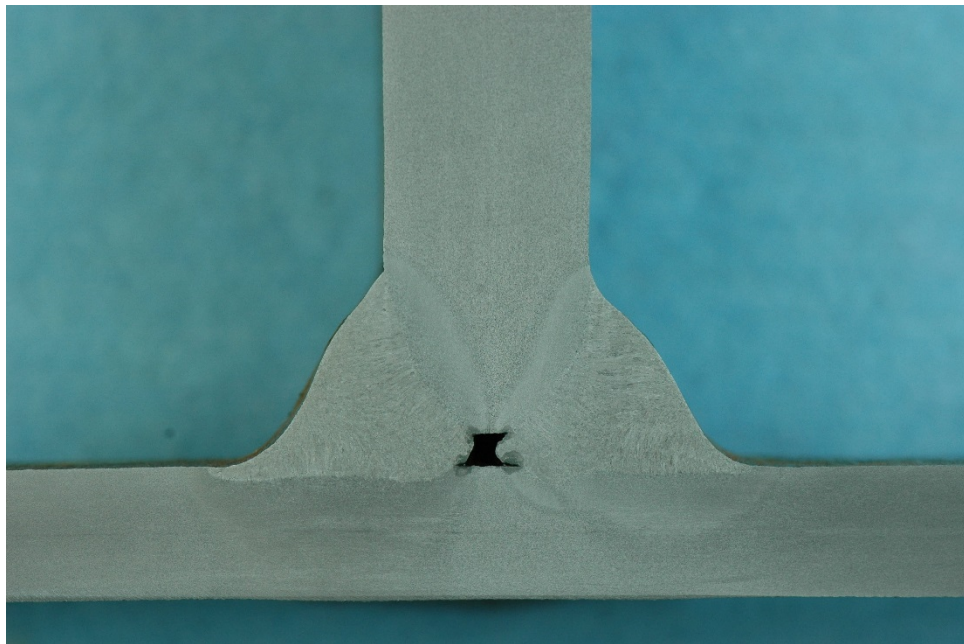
A typical macro-etched section of rib-to-floor beam weld in MU3
